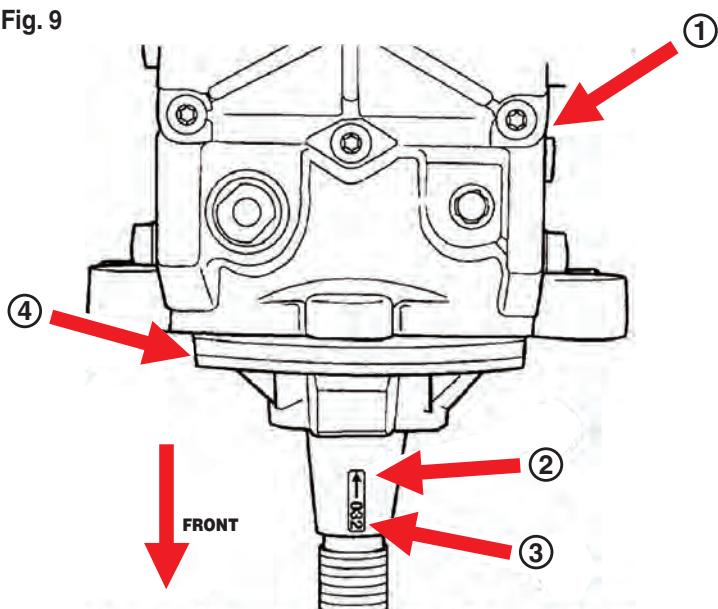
Keyway, Keyway Arrow and Keyway Number
